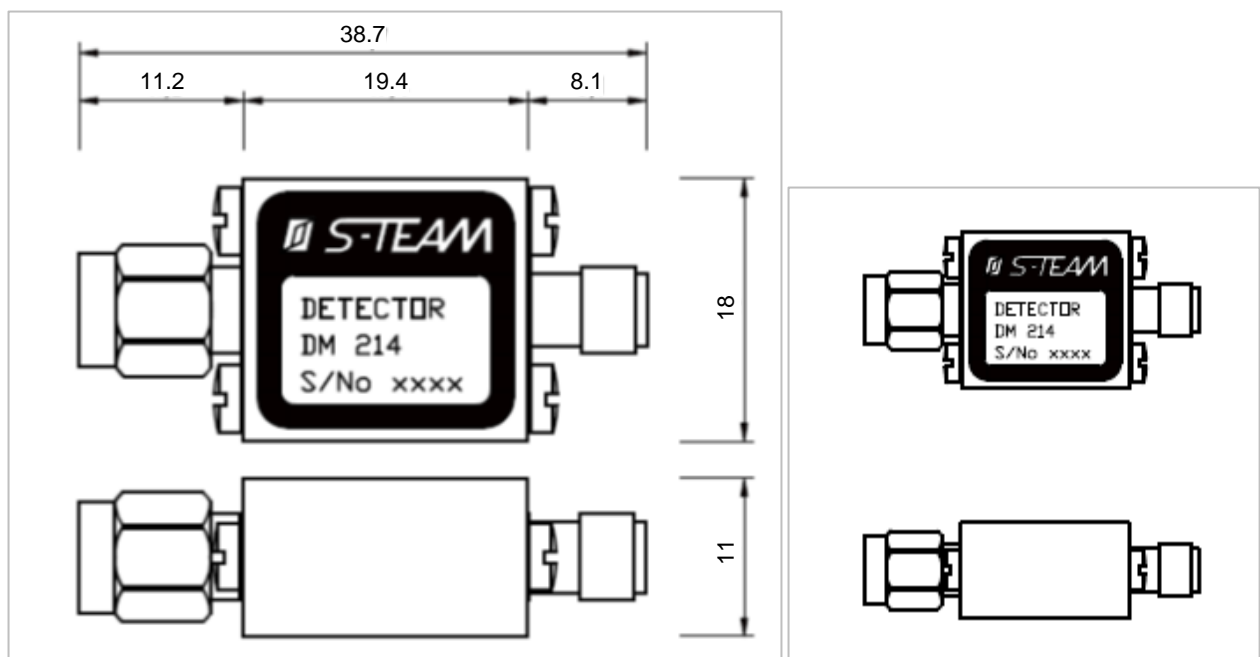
Basic DM214 dimensions (millimeters). Right: Actual size.
